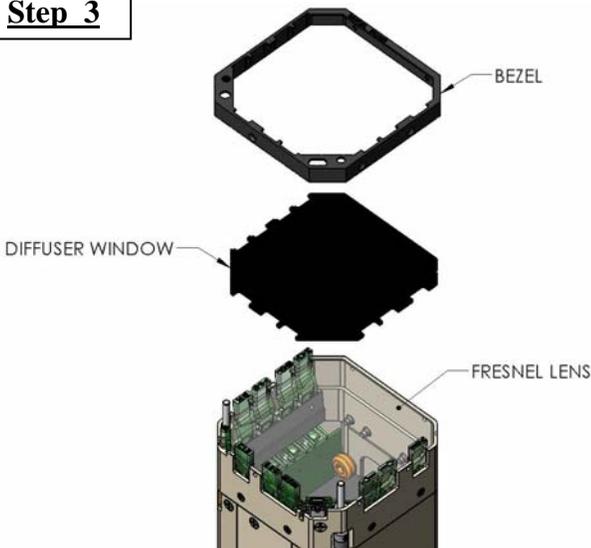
Carefully lift Bezel and Diffuser Window from unit. Do not remove or shift Fresnel lens. Remove existing window from unit.
